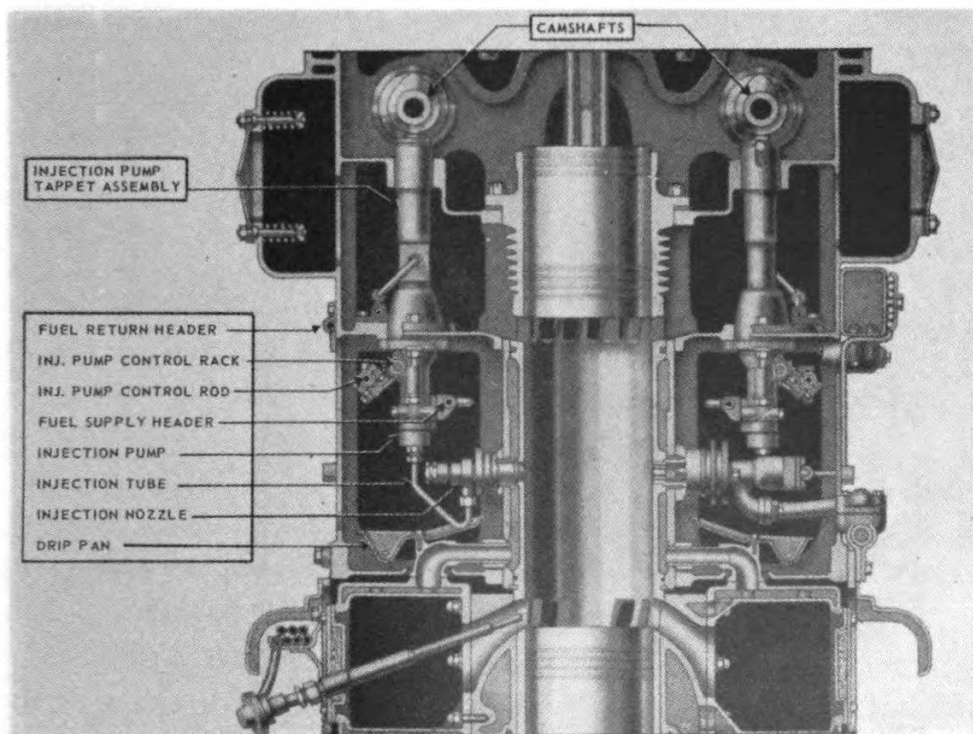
Arrangement of separate pump and nozzle injection equipment.
